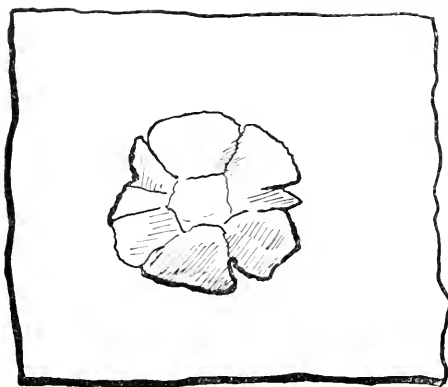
FRAYED HEAD DUE TO EXCESSIVE HAMMERING
